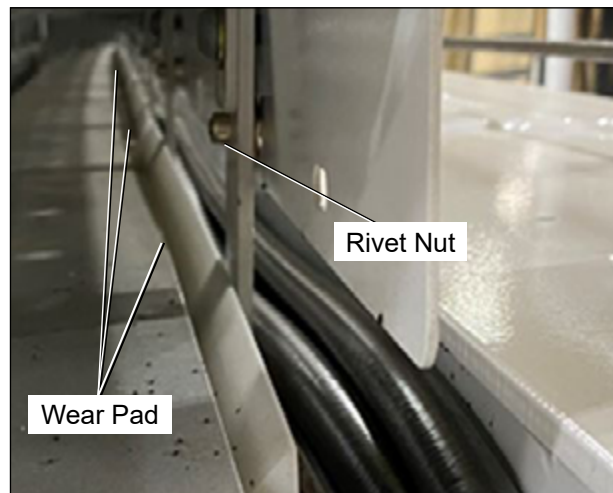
Inspecting the Wear Pads (Inside Partial View)
